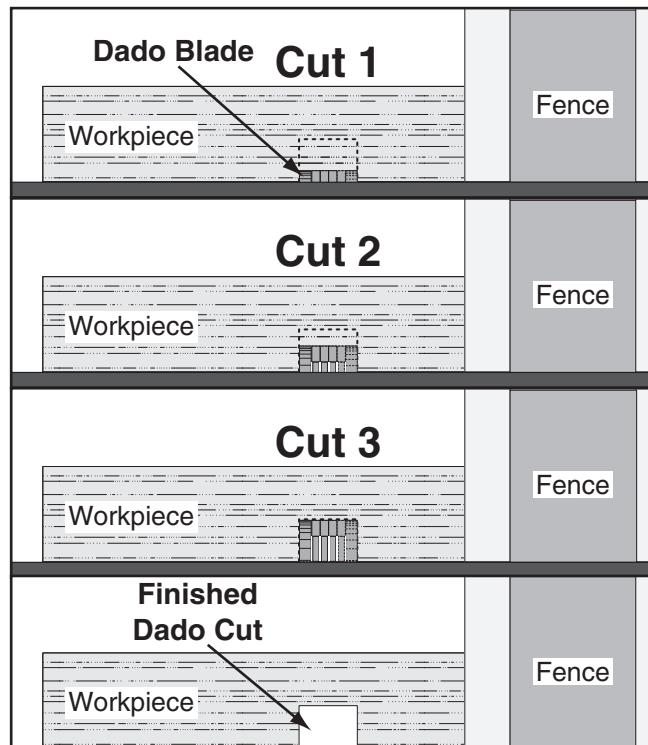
Example of dado being cut with multiple light cuts, instead of one deep cut.
